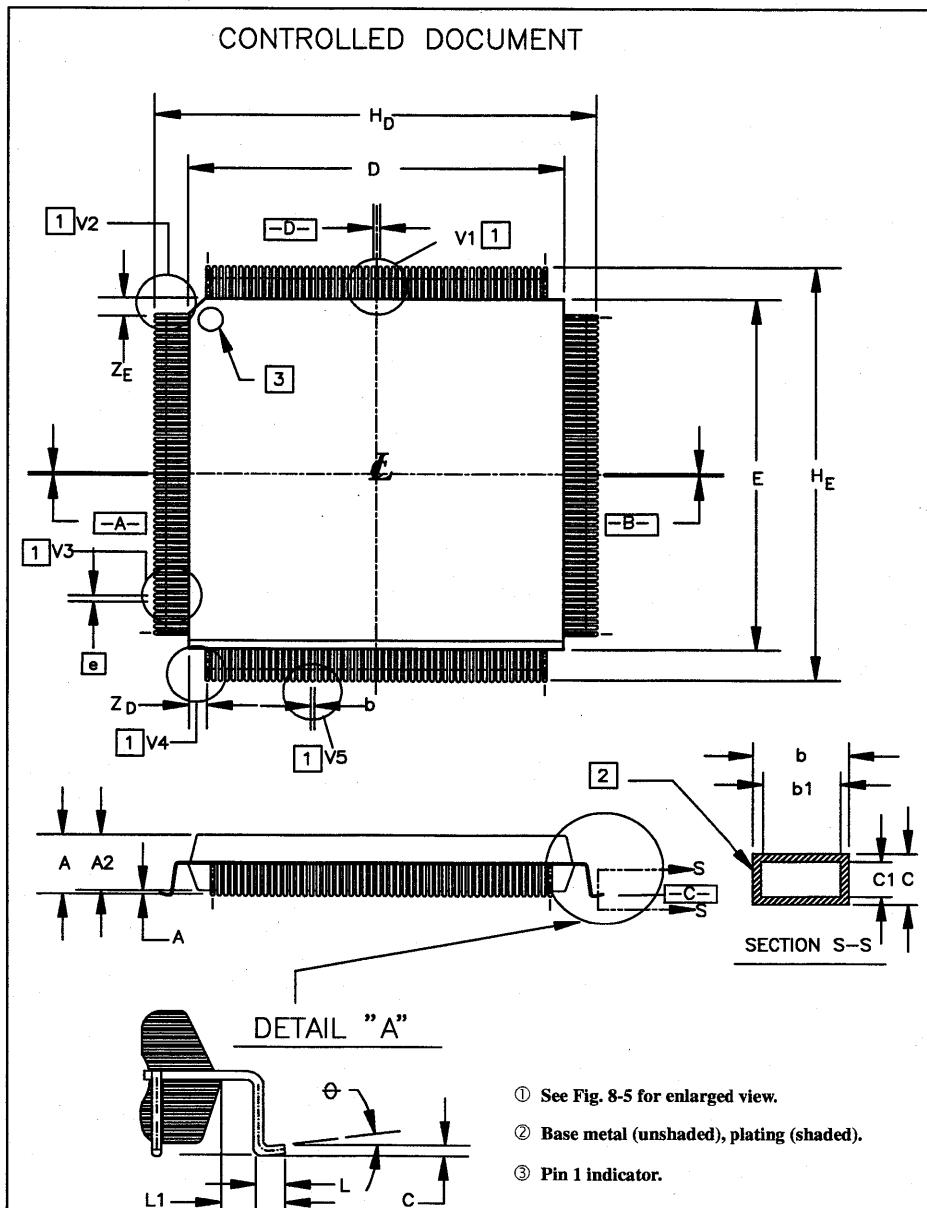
Controller Physical Dimensions (PQFP Package)
